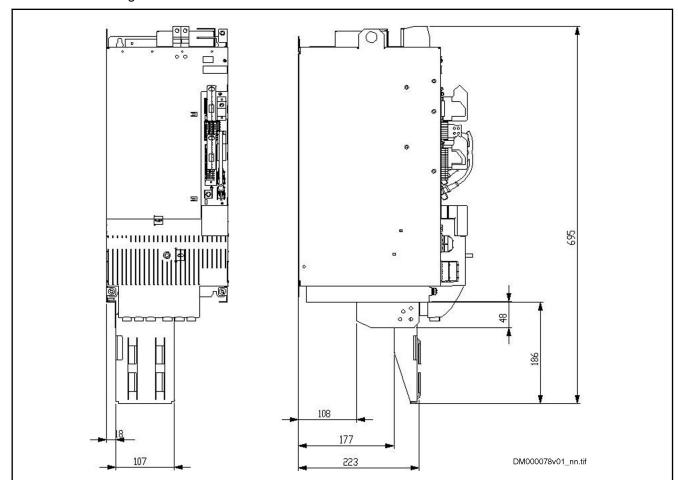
Dimensional drawing HCS03.1E-W0100 and HCS03.1E-W150 with HAS02
